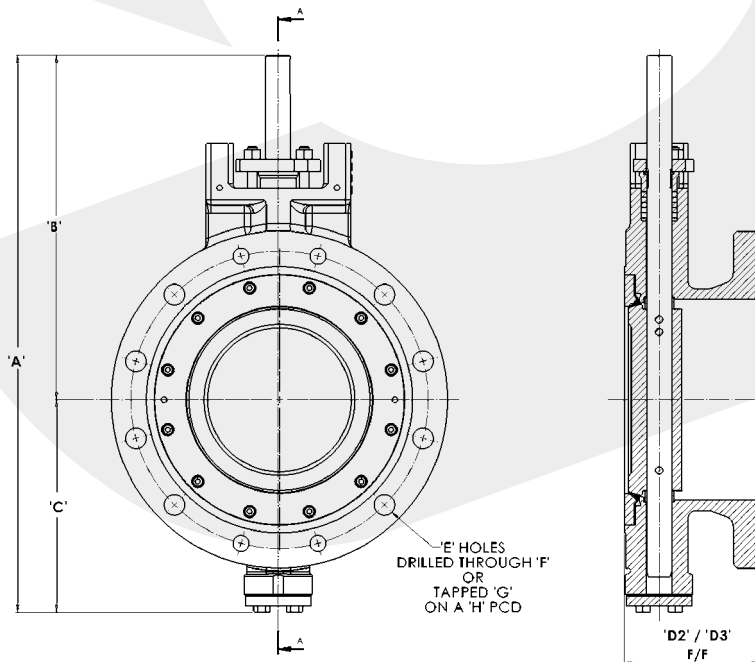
Bare stemmed GA drawing, double-offset double-flanged flat face (BU03)
